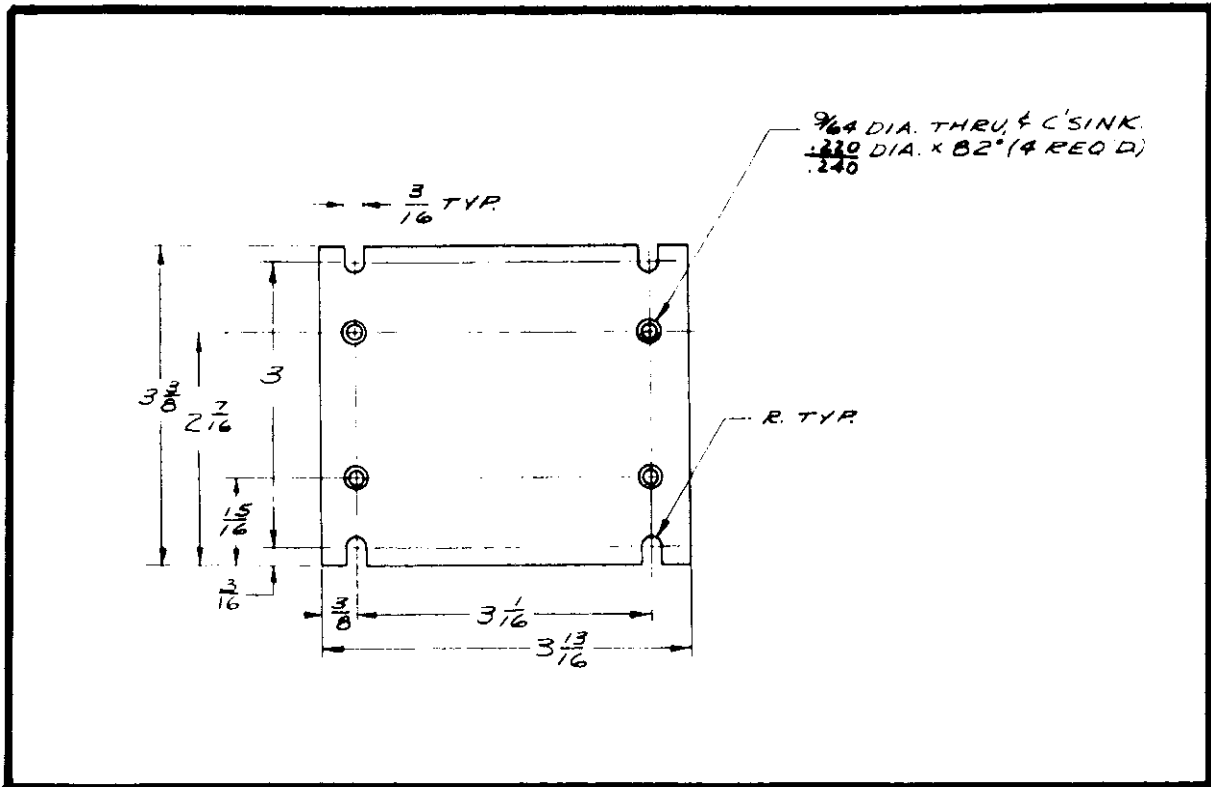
Dimensions of the Model 1082 Mounting Plate.
